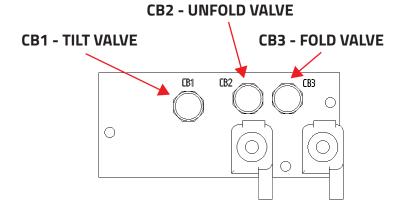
AUGER VALVE ADJUSTMENT
